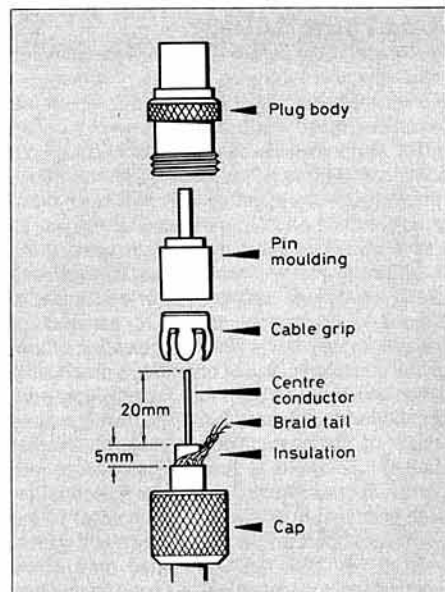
Exploded view of the Antiference coaxial plug type TVP2.
